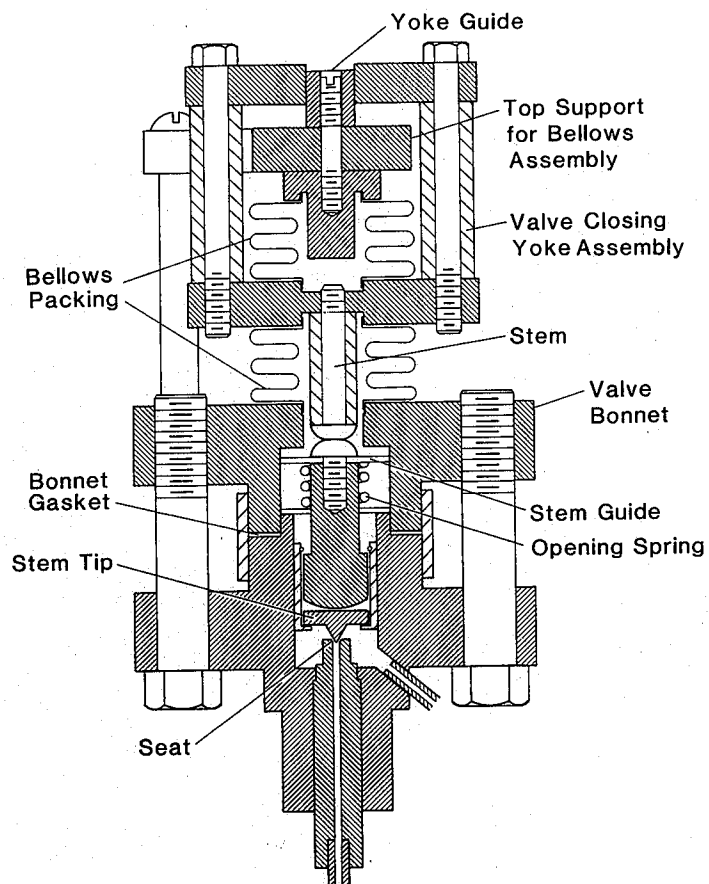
Cross section of final valve design. The drawing is approximately to scale. The diameter of the bonnet and body flanges are 23 mm.
